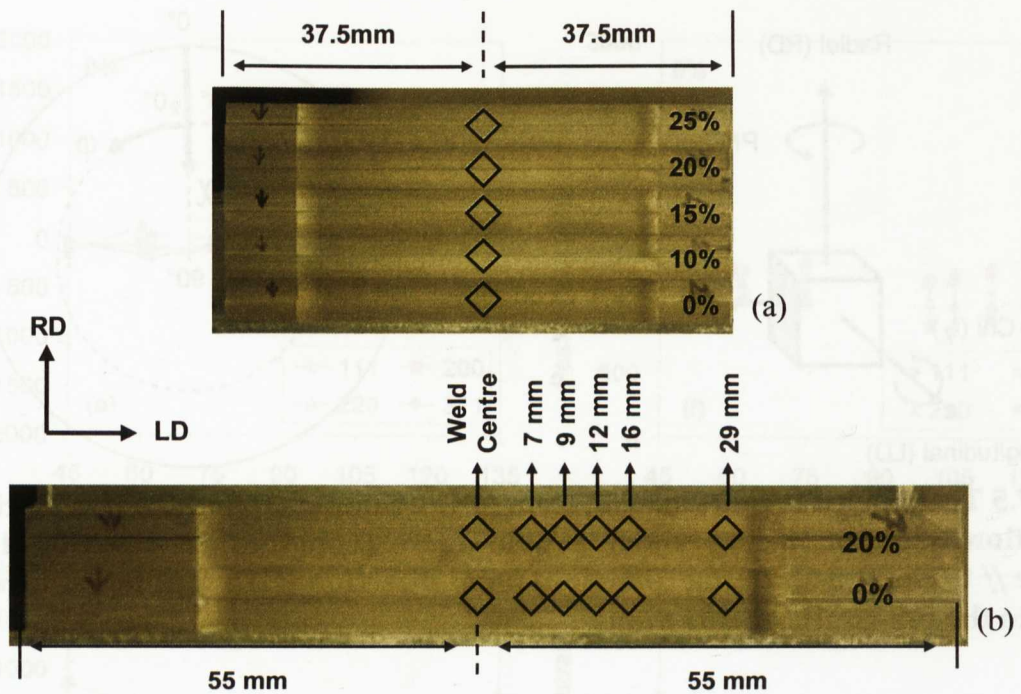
The measurement positions in the stacked: parent (remote-end) specimens (a) and cross-weld specimens (b)
